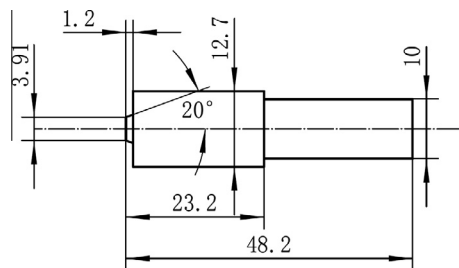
Detailed dimensions of the FSW tool (unit: mm).
